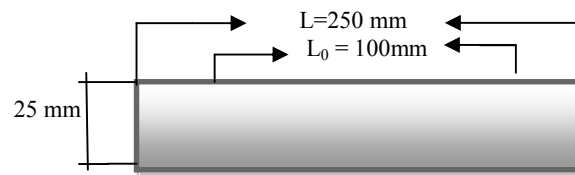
Composite tensile specimen with a thickness of 3.2 mm.
